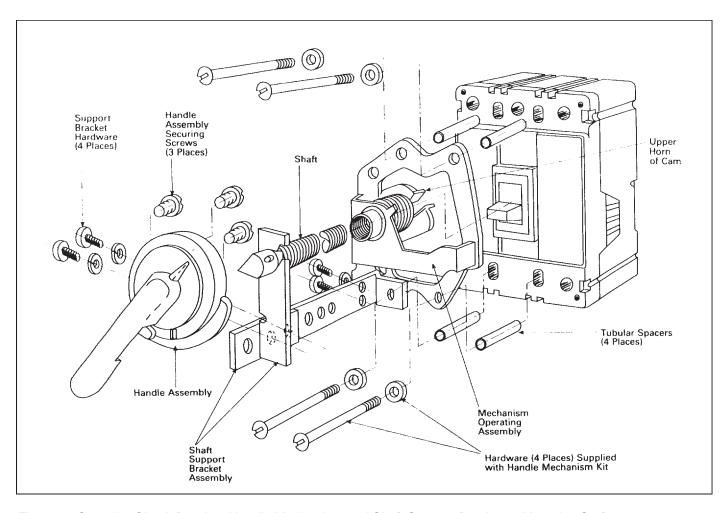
Securing Circuit Breaker, Handle Mechanism and Shaft Support Bracket to Mounting Surface.
